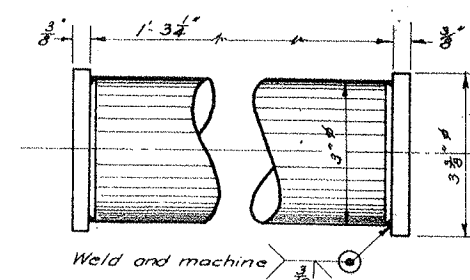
DETAILS OF BEARING ASSEMBLY EP-200 (24 REQ)
